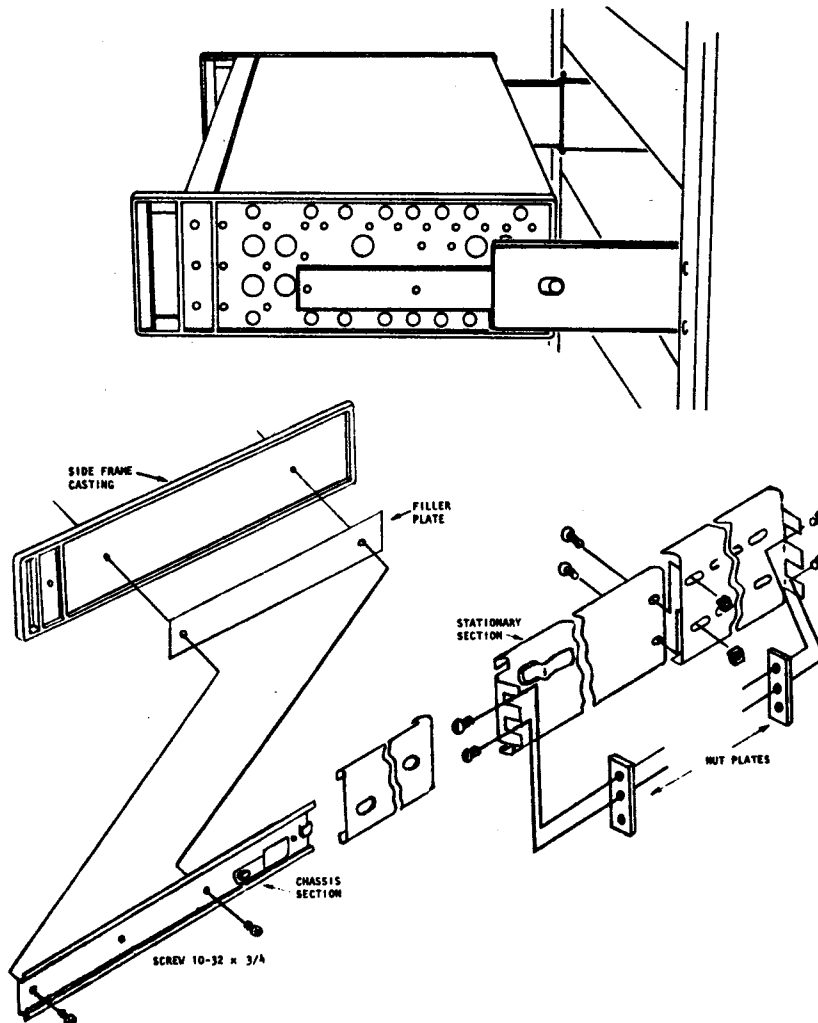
SLIDE ASSEMBLY OPTION 11
